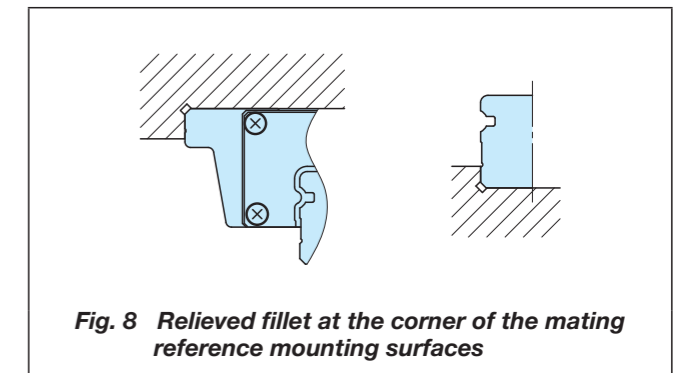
Relieved fillet at the corner of the mating reference mounting surfaces
